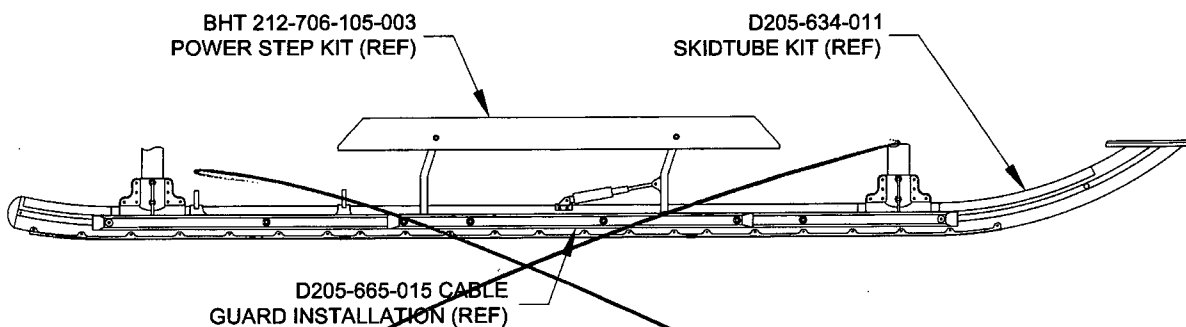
BHT Power Step Kit Installed on the Dart D205-634-011 Skidtube With the D205-665-015 Cable Guard Installed
